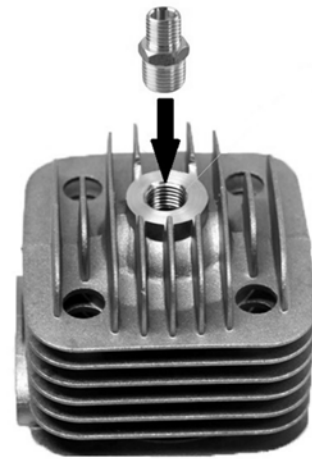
Modified cylinder head ready for fitting adapter nipple.
